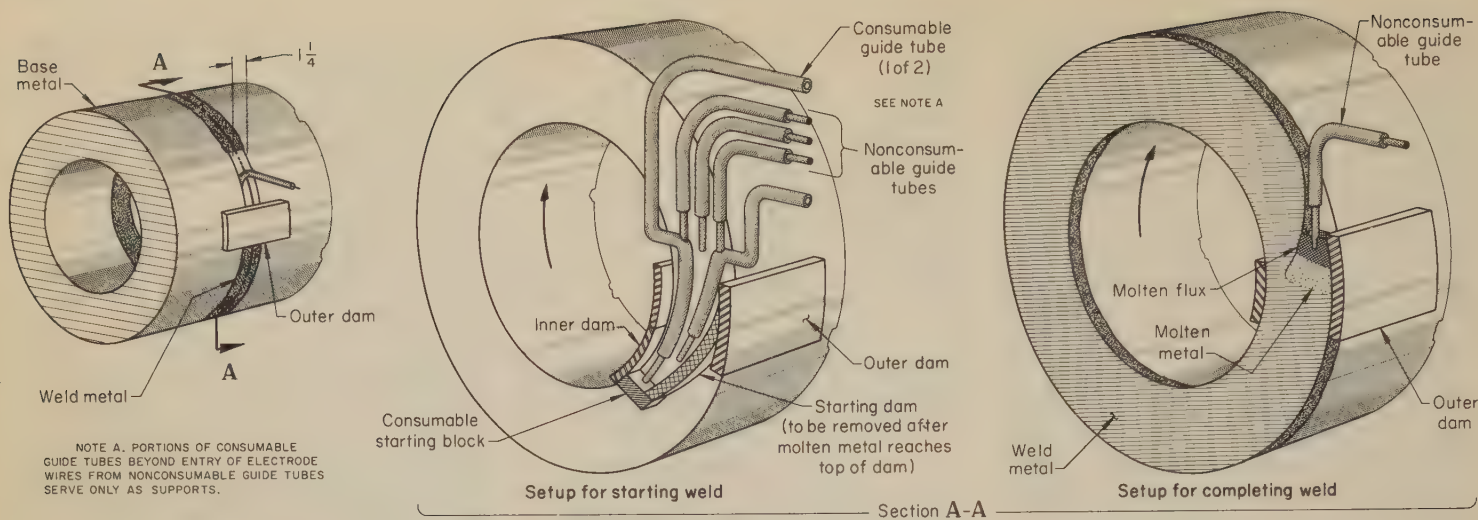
Electroslog welding of cylindrical sections, using a combination of the conventional and consumable-guide-tube systems. Note setups for starting the weld, obtaining initial contour, and completing the weld.
